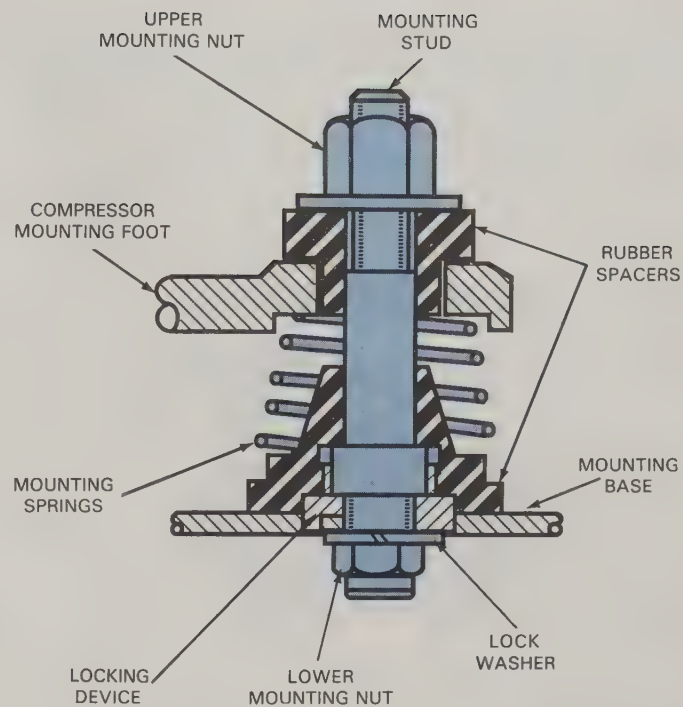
The typical means of mounting a compressor, designed to minimize noise and vibration. Four such mounting assemblies are normally used.
